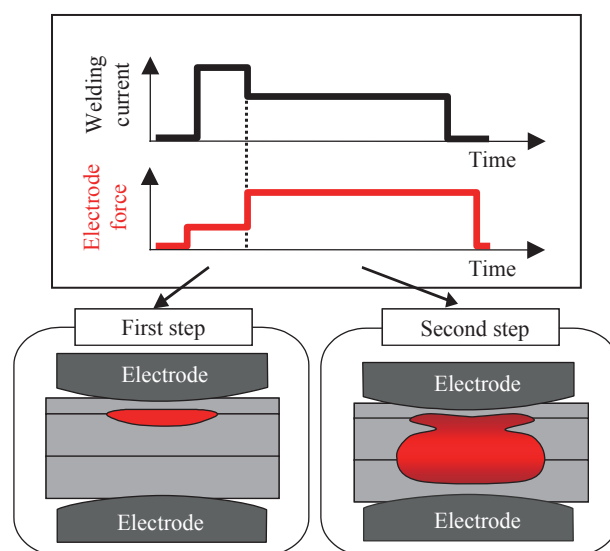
Schematic illustration of Intelligent Spot™ welding process for three-sheet-joint with higher sheet thickness ratio
